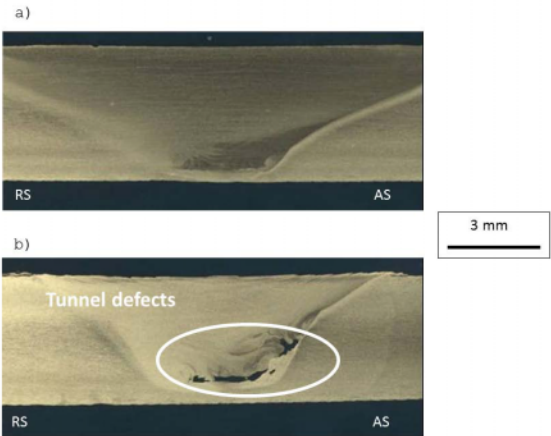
Optical macrographs of transverse metallographic cross-sections for (a) 400 RPM/2 IPM showing a full penetration defect free weld and (b) 400 RPM/7 IPM showing tunnel defect formation at a higher tool traverse rate. (RS=retreating side, AS=advancing side)
